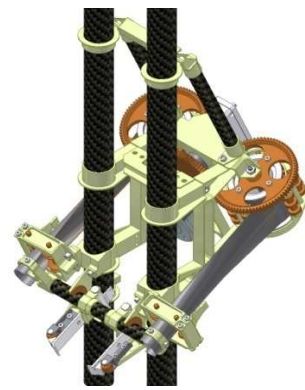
MUPUS manipulator (deployment device) in stowed configuration, CAD drawing
